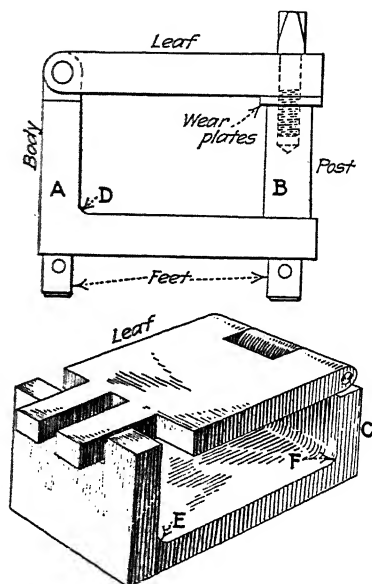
Standard Angle and Channel Iron Jig Bodies
